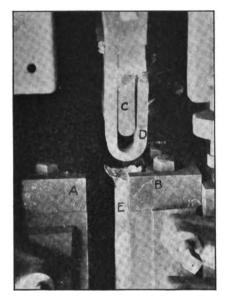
TOP VIEW OF WELDING MACHINE— BRAKE ROD PARTS IN POSITION
